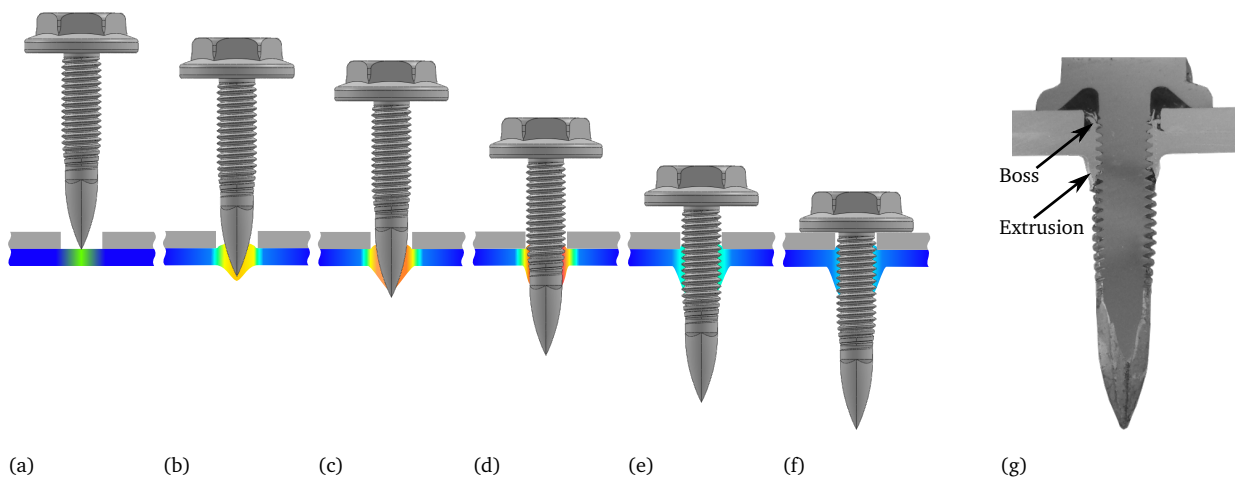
The FDS process. (a) Heating. (b) Penetration. (c) Extrusion forming. (d) Thread forming. (e) Screw driving. (f) Tightening. A picture of an FDS connection is shown in (g), with the boss and extrusion indicated.
